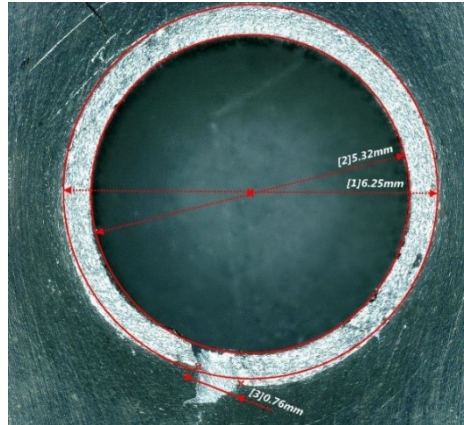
Hole expansion specimen with uniform deformation and no necking before fracture
